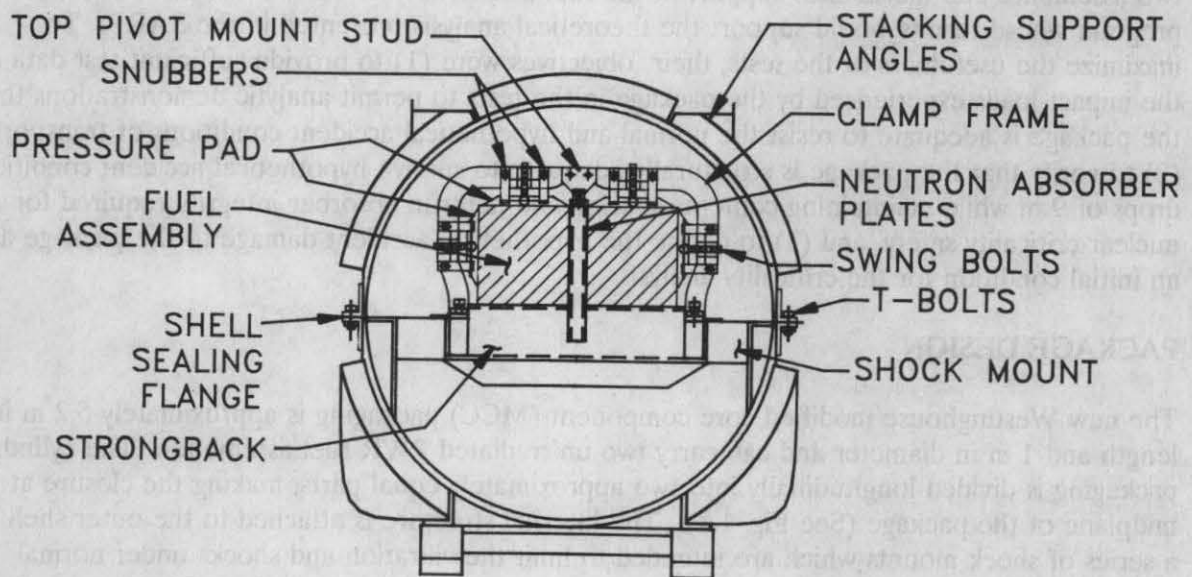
B. A Cross-sectional View of the Westinghouse MCC Shipping Package
